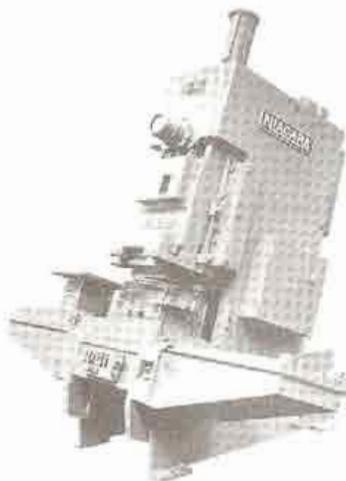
Inclinable gap-frame press with sliding bolster to accommodate two die sets for rapid change of tooling. (Courtesy of Niagara Machine & Tool Works, Buffalo, NY.)
